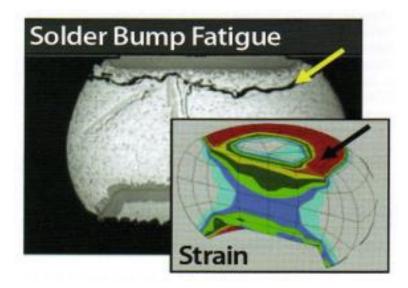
BGA solder ball fatigue fracture and corresponding FEA model of fracture
